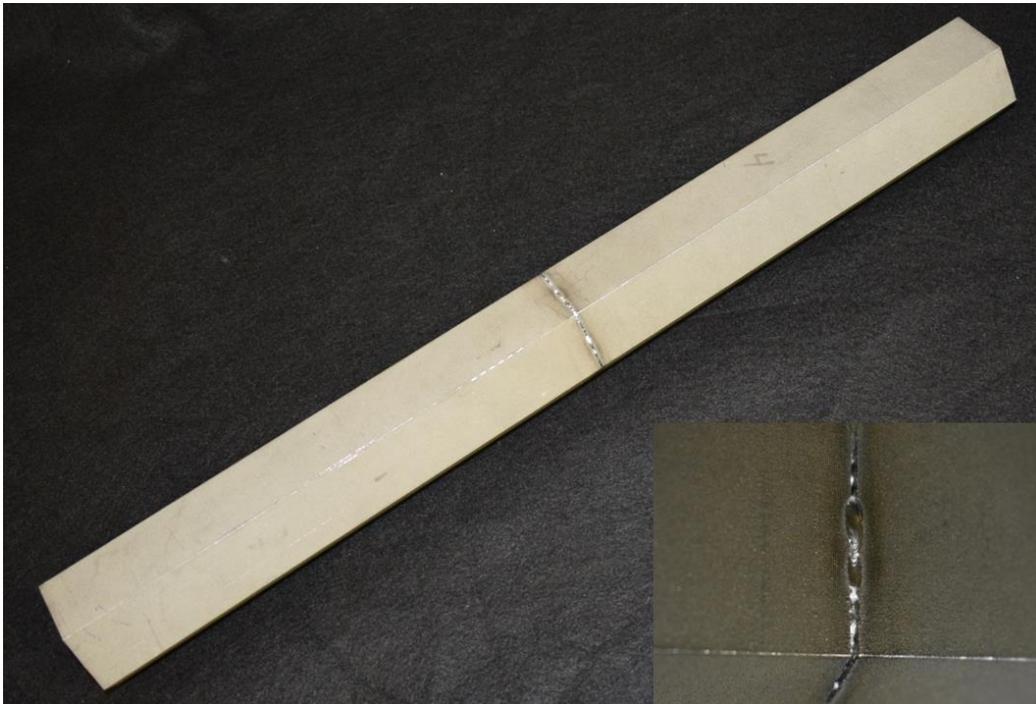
Image showing completed 22" long Block 7 design with a single tier weld performed during a rotary butt weld in an electron beam welder. Inset shows surface quality of the weld. Imperfections in fill at the corners as seen in the inset can be easily remedied with a cover pass.
